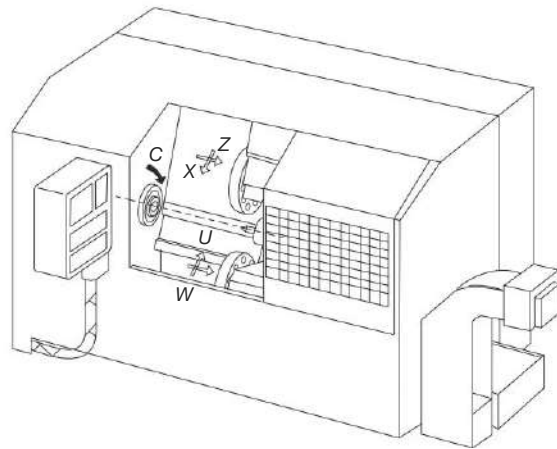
Axes designation for CNC turning centre with twin turrets and driven tooling
